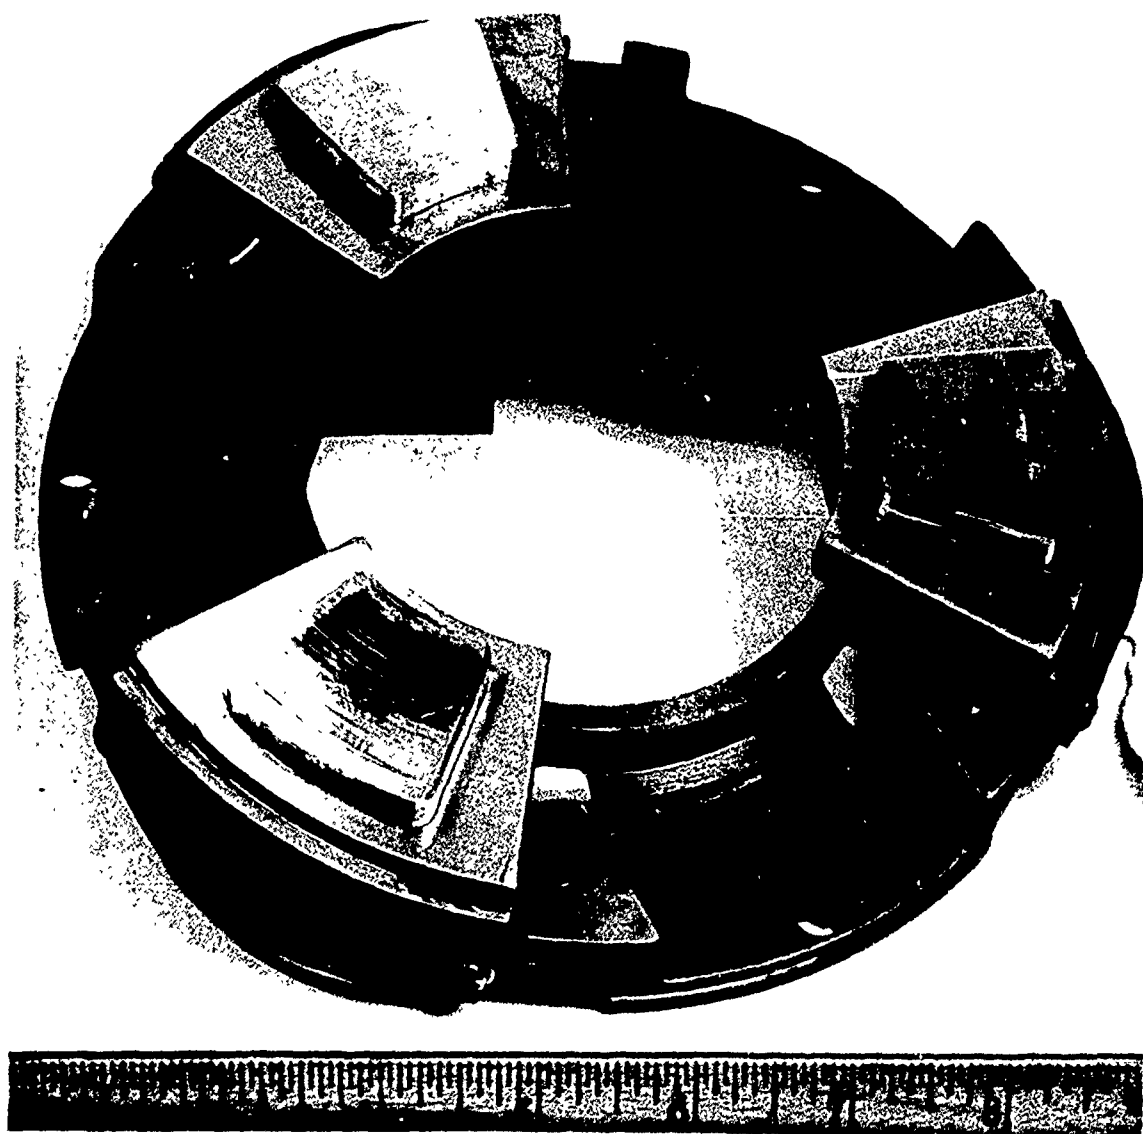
Tilt-Pad Assembly, Centered (After Test)
